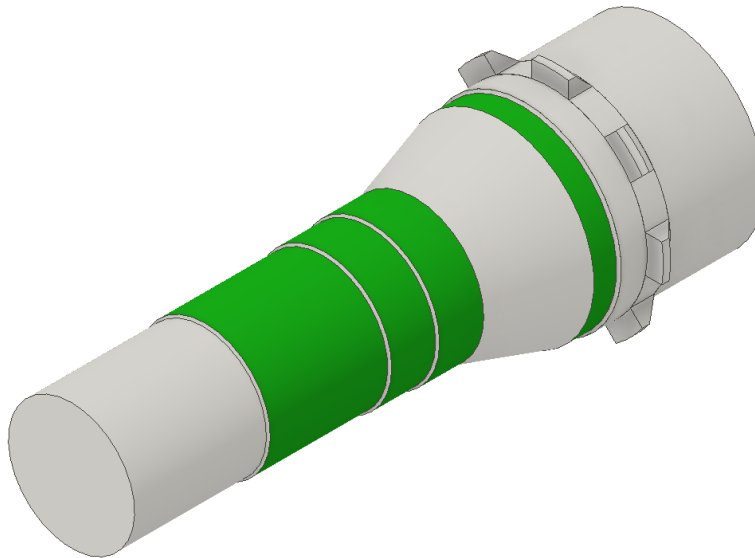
Locations where the Impeller Seats Against the Shaft
